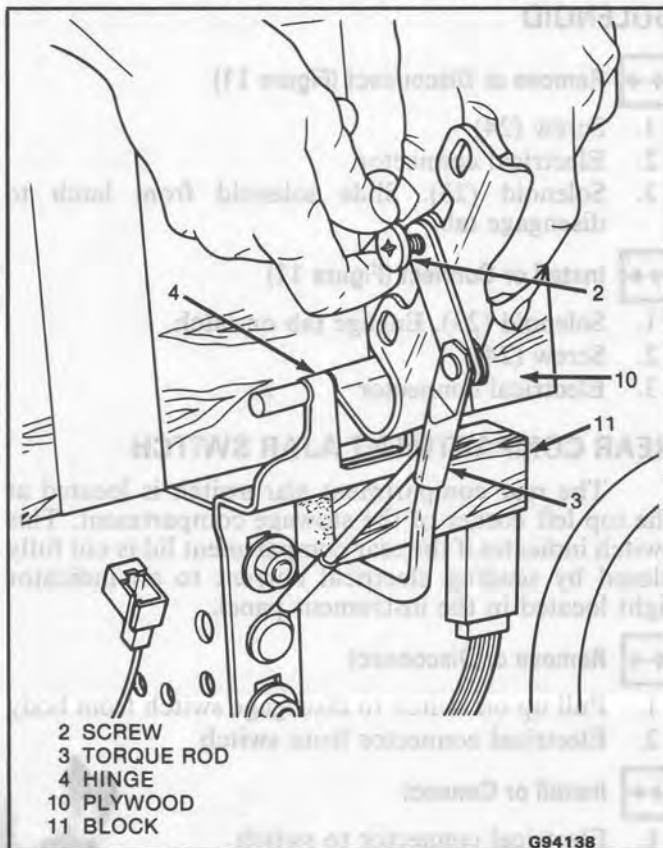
Attaching Rear Compartment Lid Torque Rod
